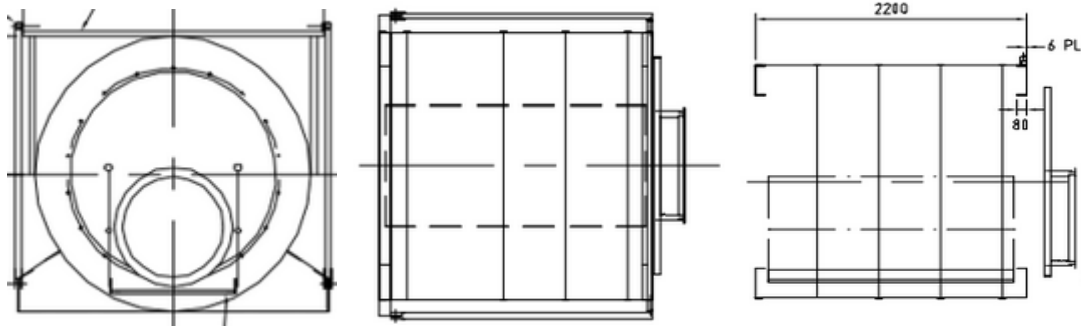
The front elevation. Figure 4.4.9 The vertical elevation Figure 4.4.10 The side elevation
